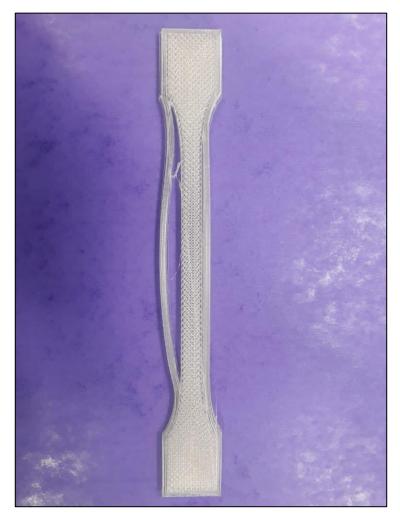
3D printed piece with the extruded Pellethane 2102-65D filaments
